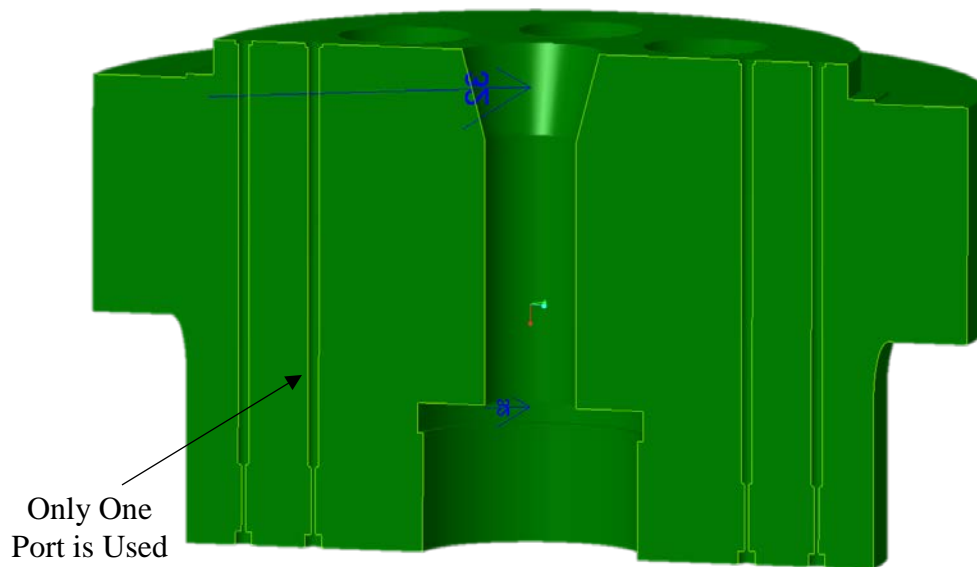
Bottom Closure Plug in Heater Vessel
